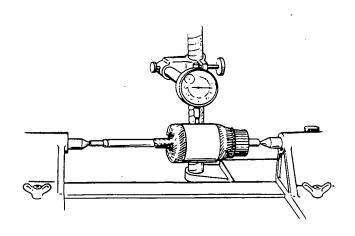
CHECKING ARMATURE SHAFT RUNOUT
